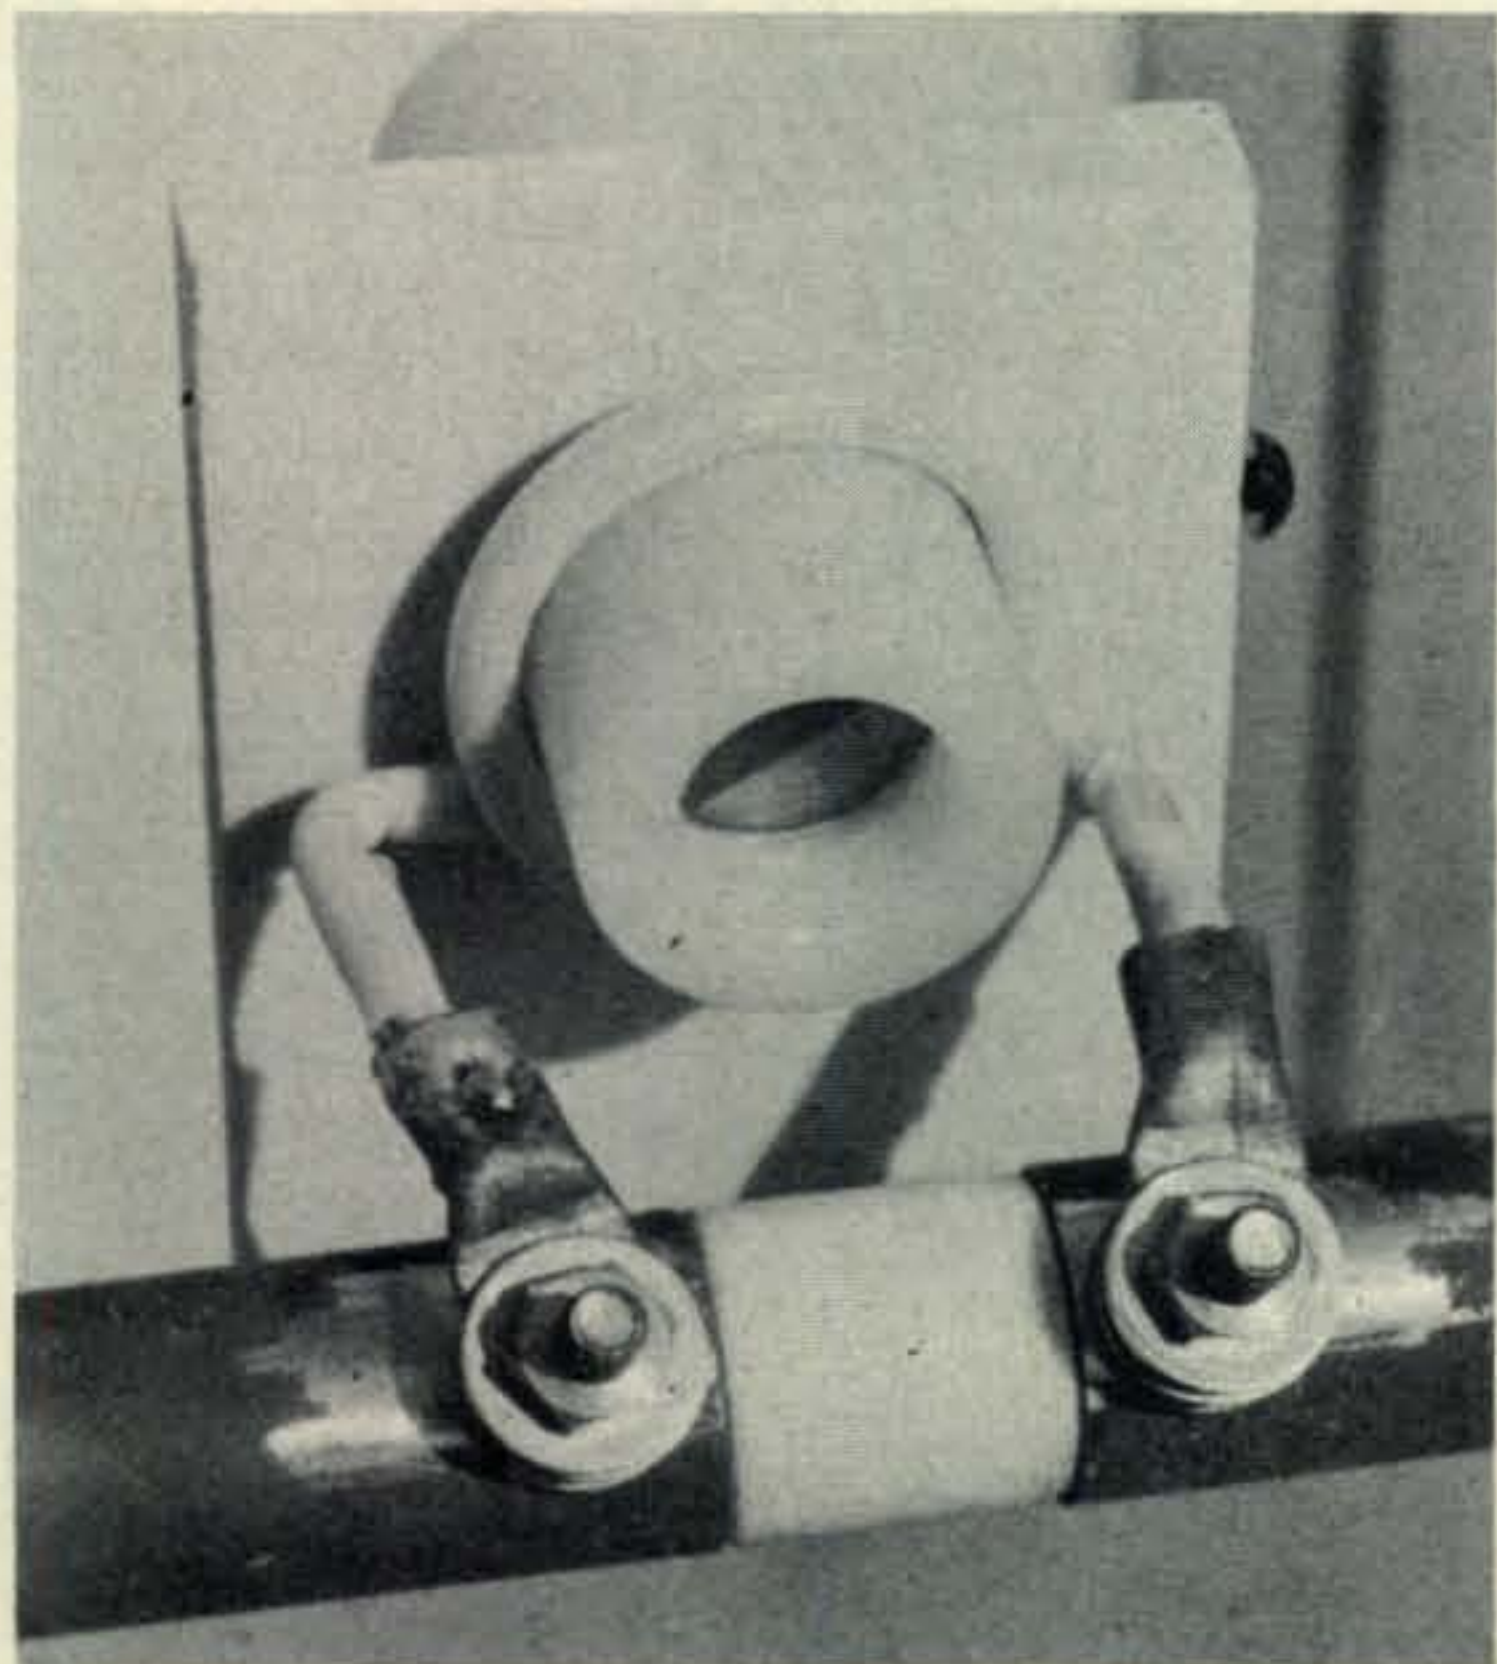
Variable inductor assembly controlled by threaded brass slug.
